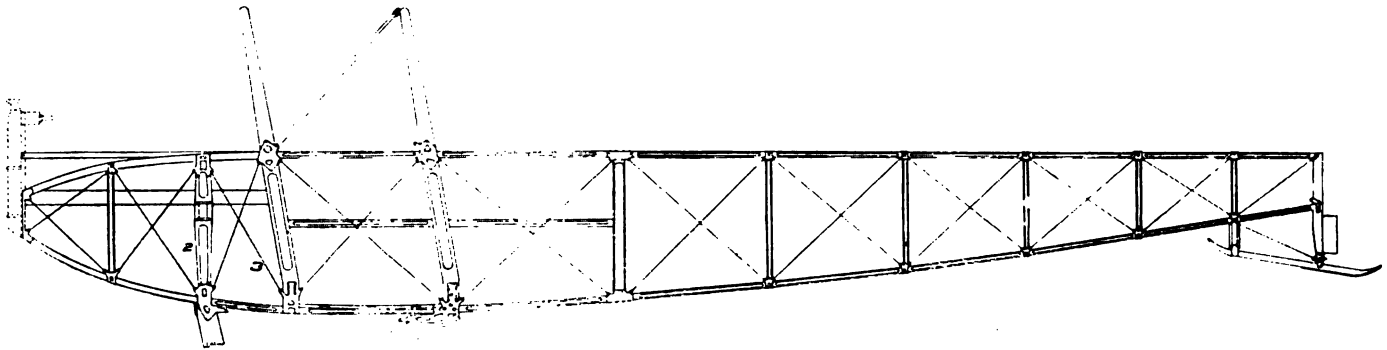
LAYOUT OF BODY FOR STANDARD TRAINING MACHINE.
